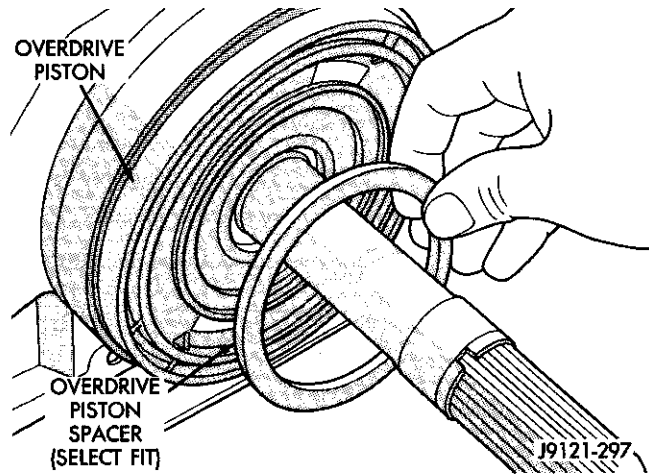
Overdrive Piston Thrust Plate Removal/Installation
